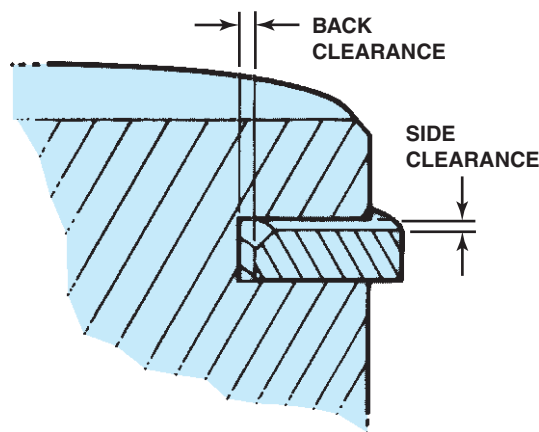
The side and back clearances must be correct for the compression rings to seal properly.
